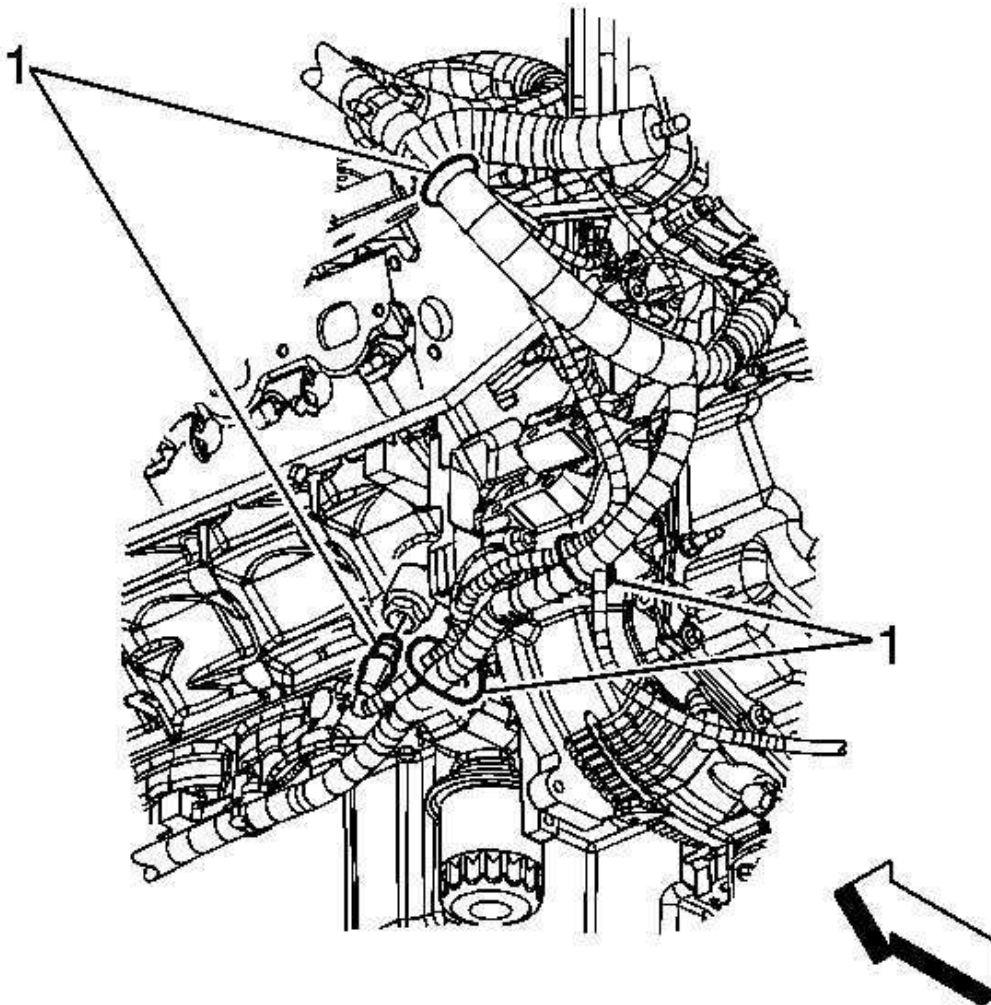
Locating Tie Straps Attaching Coolant Heater Cord To Engine Wiring Harness
